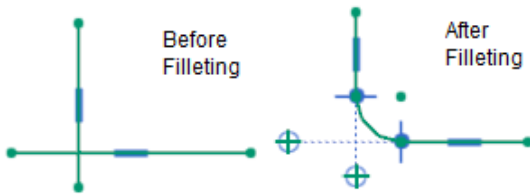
Sharp corner before and after filleting using the Trim button
